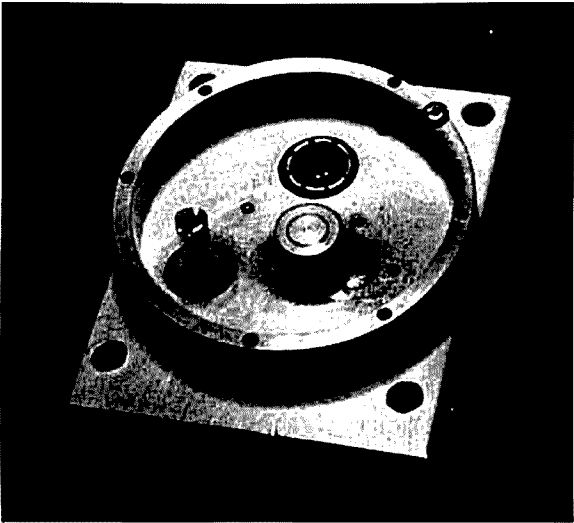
Heater/cathode assembly uses parts from surplus 2C39 amplifier. Material for the mounting plate is 0.093" (2.5mm) brass. Use the mounting plate as a template to locate four 2-56 tapped holes for assembly with the cathode partition.
